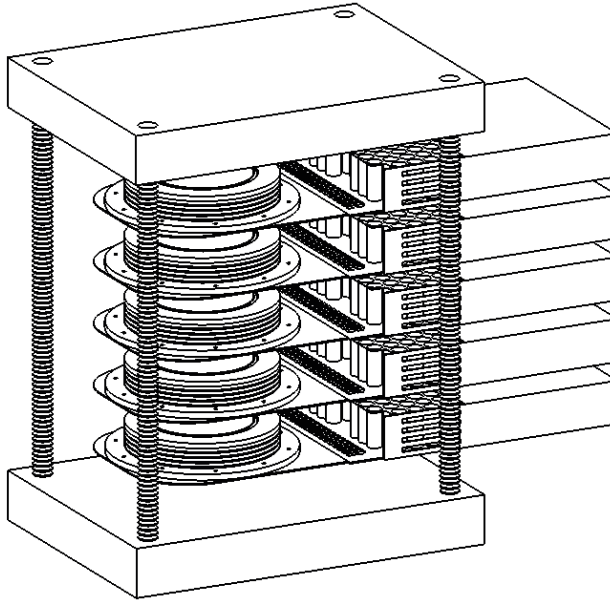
Typical integration of IGCT power units into HV switch assembly.
